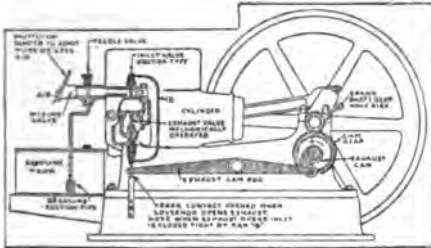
A horizontal engine (Witte), with a rocker arm for operating the exhaust valve mechanically. The inlet valve is automatic but when the exhaust valve is opened, note the bar (12) closes inlet tight, although a spring is also provided.
